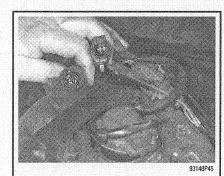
You can unplug the actuator, although it is not necessary to replace the air spring
